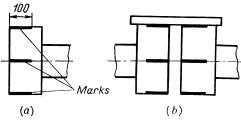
Marking-out of the outer surfaces of half-coupling rims (a) and alignment of shafts with a straightedge against marks applied by means of a centre locator (b)
